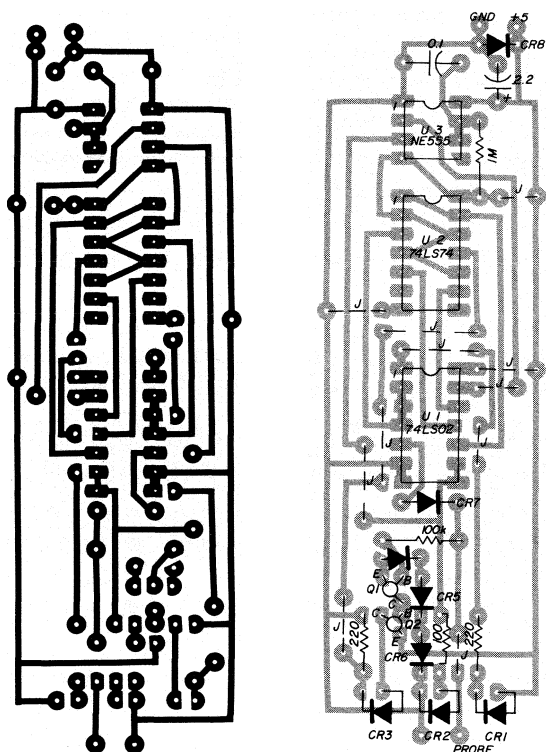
Suggested printed-circuit board layout and parts placement diagram for the logic probe. If desired, pre-punched board and simple point-to-point wiring may be used.
